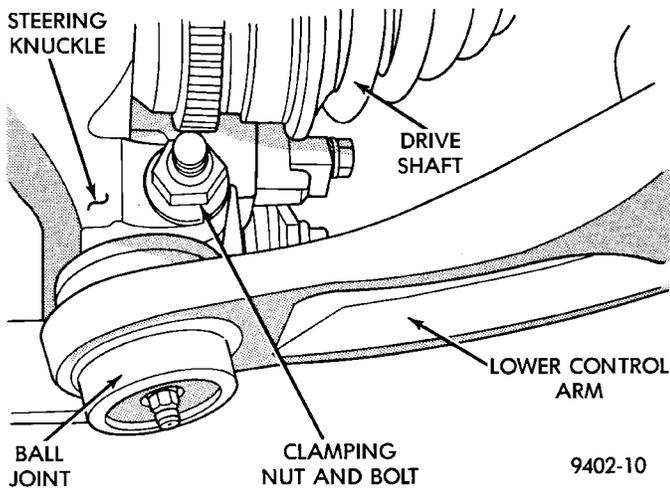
Steering Knuckle To Ball Joint Clamp Bolt from steering knuckle, so ball joint seal does not get cut.
